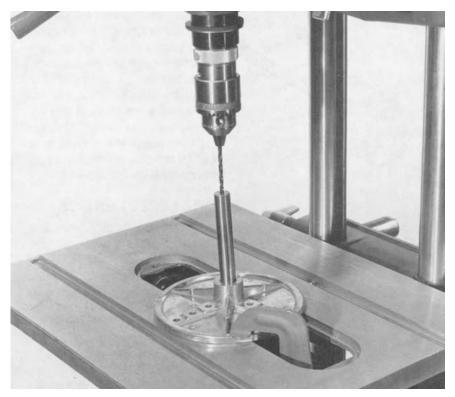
Use a lathe faceplate to hold round bar stock for concentric drilling. If the stock is positioned carefully, this idea can be used for stock with a diameter that is less than the hole size in the faceplate.
